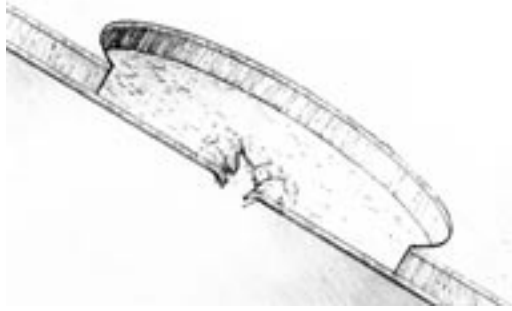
Cut back the outer skin and core several centimetres from the hole in the inner skin.
